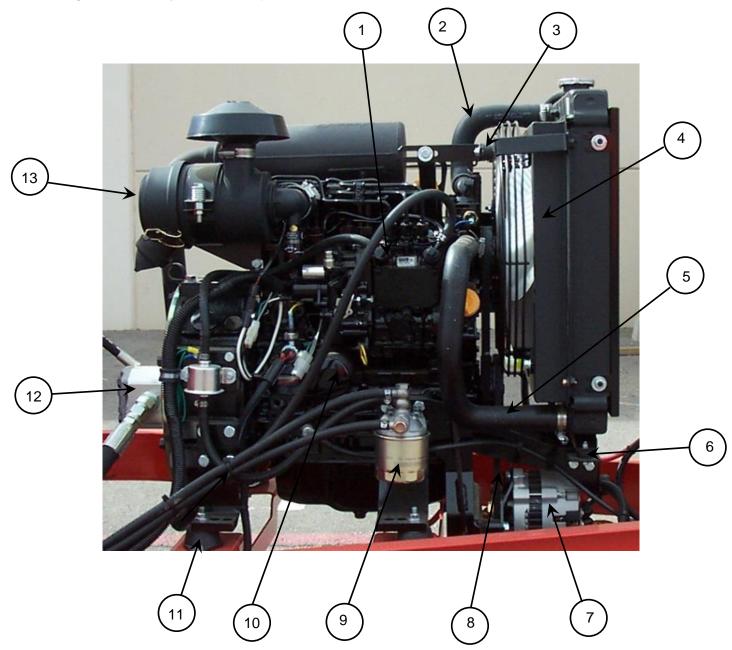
Engine Assembly - 46200EB, 46200SB
